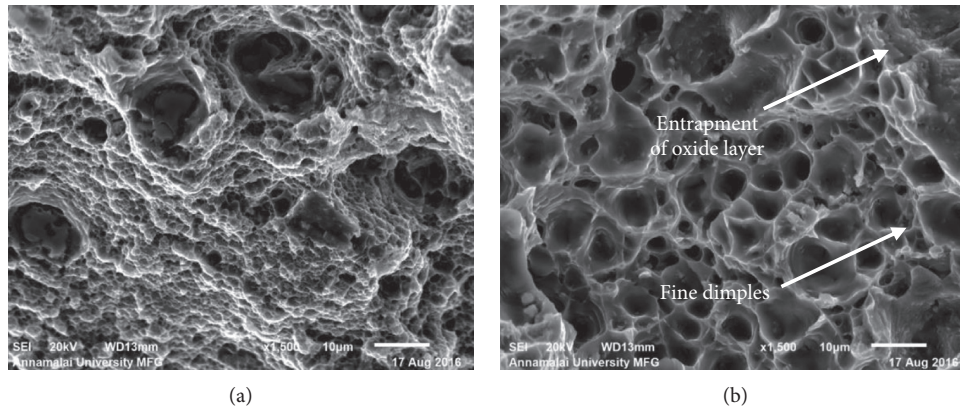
SEM fractography of (a) BM and (b) PCMT welded joint.
